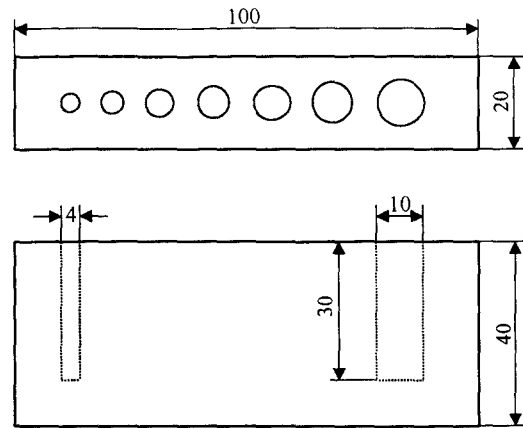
Schematic drawings of specimen for TiN coating, (a) top view, (b) cross-sectional view.
